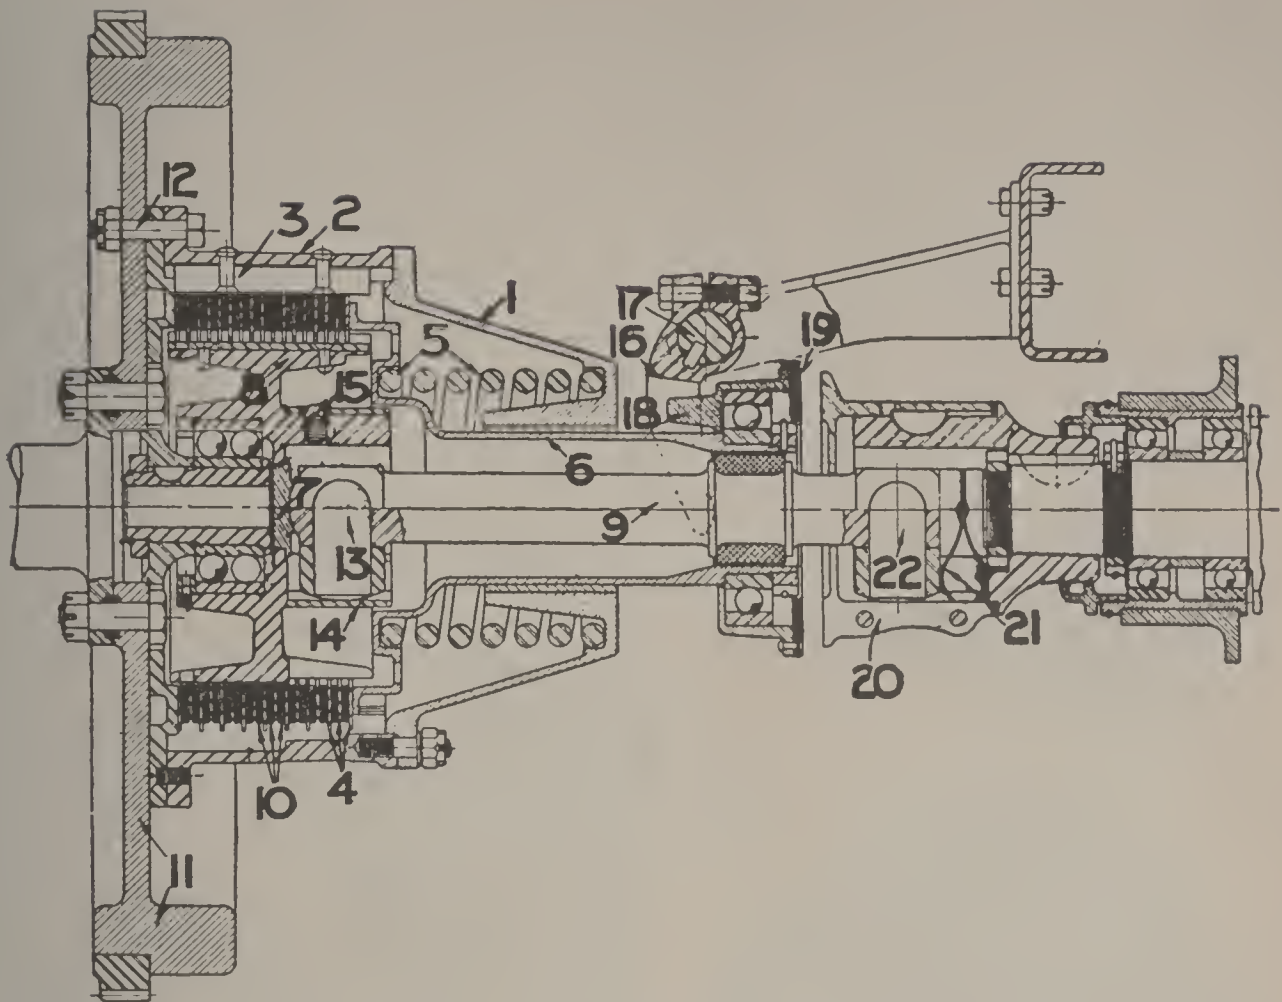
Floating Dry Disk Clutch Used on Locomobile Cars
